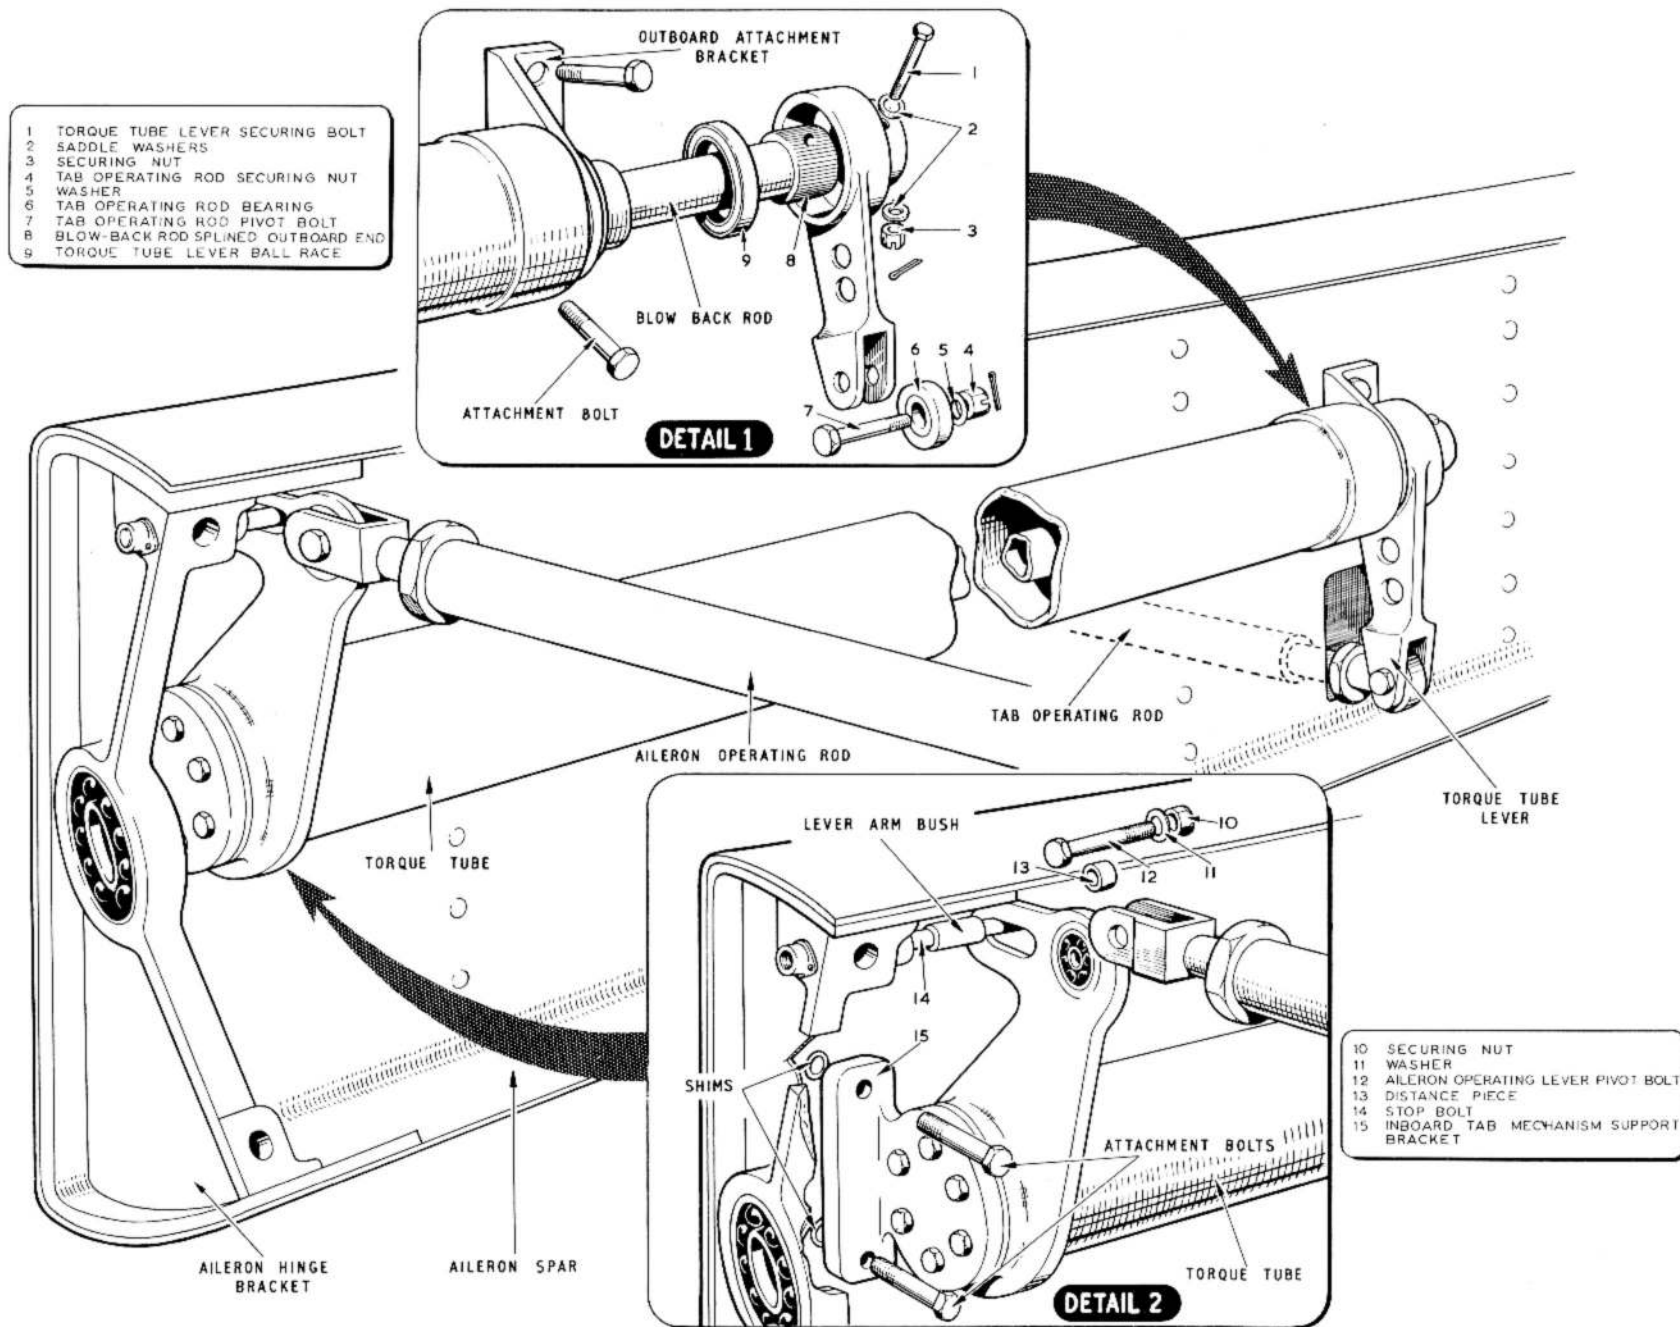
Aileron spring tab mechanism removal (pre Mod.1441)
